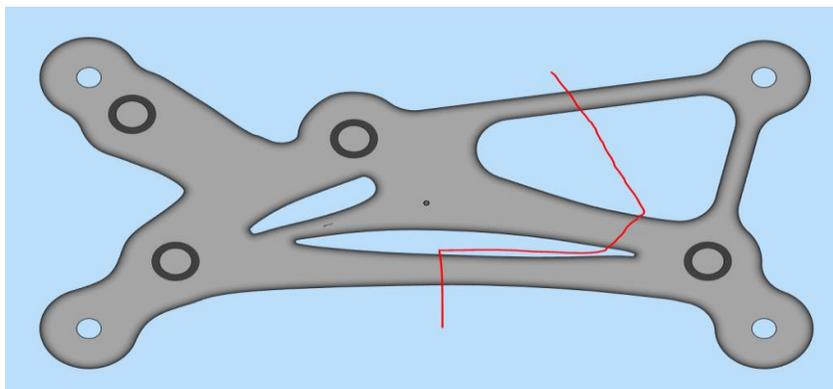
The fracture path that Team Member C identifies when twisting the part.
